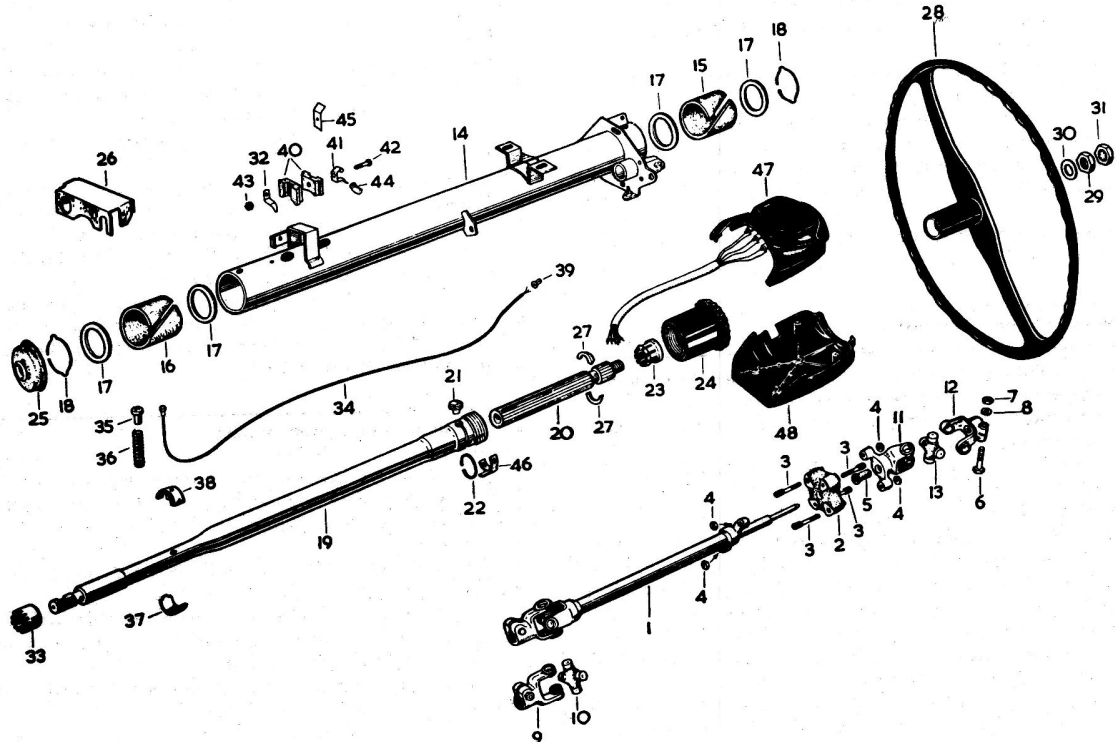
TYPICAL STEERING COLUMN ASSEMBLY
